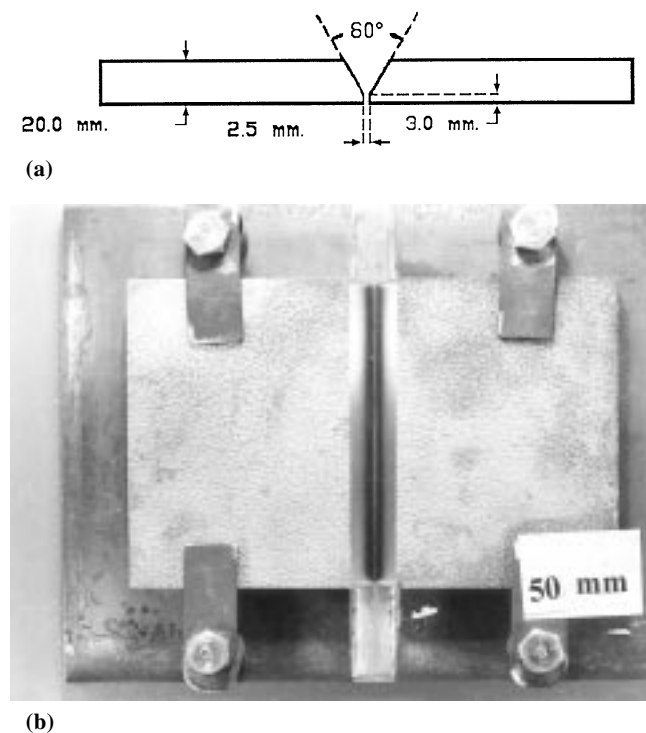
(a) Single V-joint design for welding. (b) Experimental arrangement for the welding procedure
